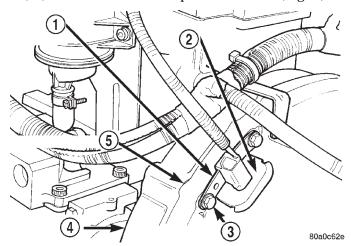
Crankshaft Position Sensor —2.5 and 4.0L Engine
